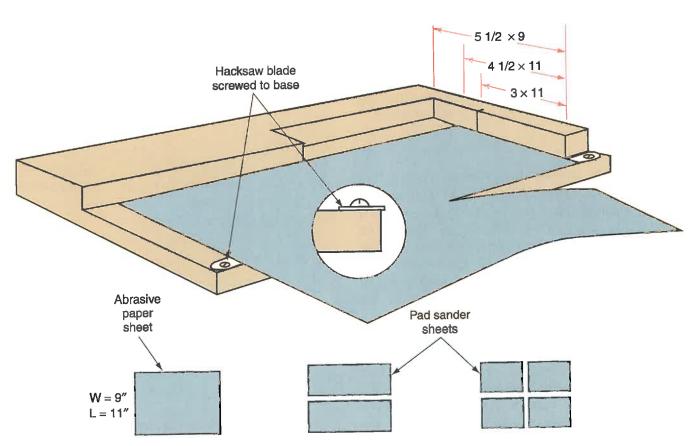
Prepare a jig to tear abrasive paper. Mark standard sheet sizes.
